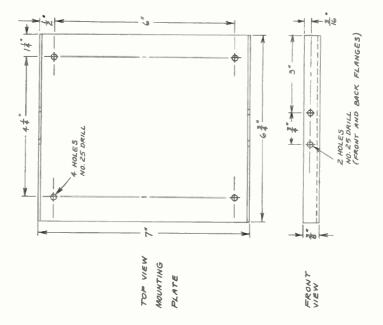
Mounting plate layout and hole-drilling guide.
